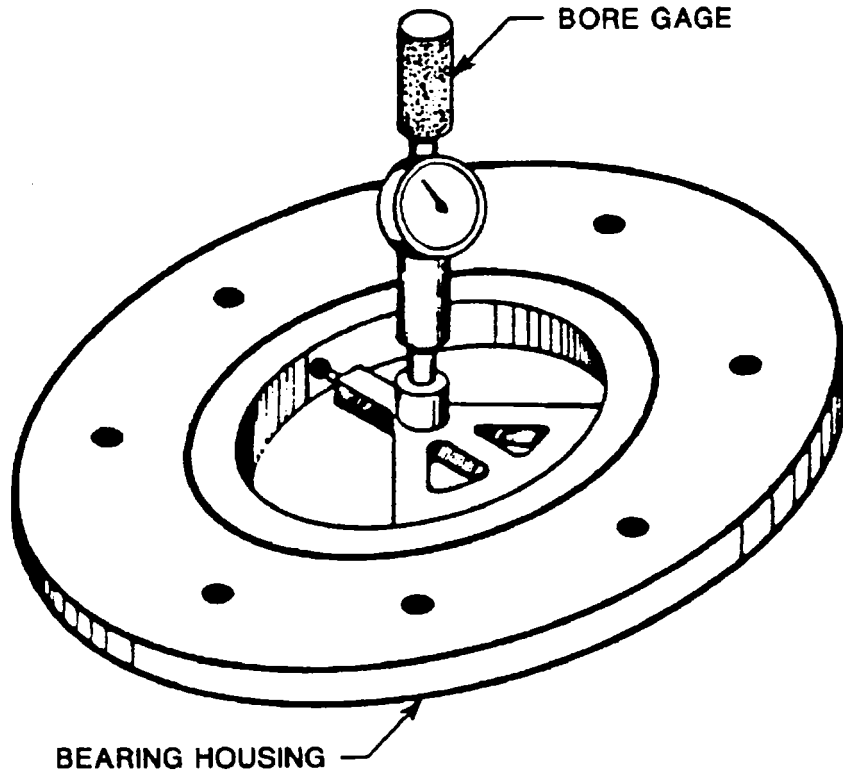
Measuring Bearing Housing Bore with Bore Gage
